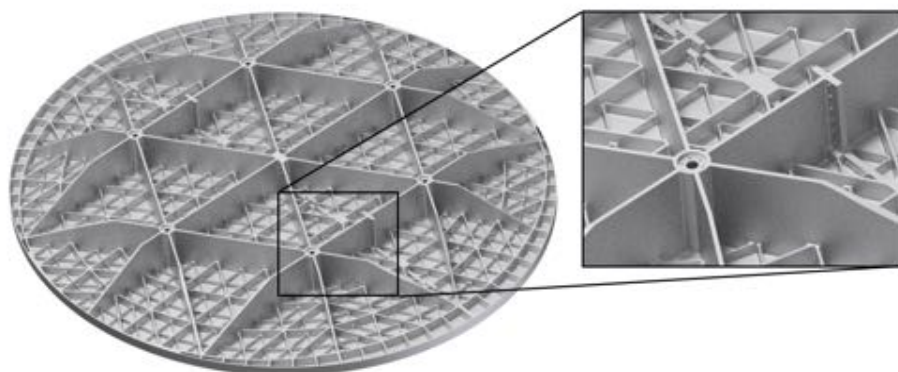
Rear rib structure of the primary mirror. The two halves are premachined on the rear side, and after mating faces are machined flat they are bolted and pinned together. Finally the front surface is machined to final figure.
